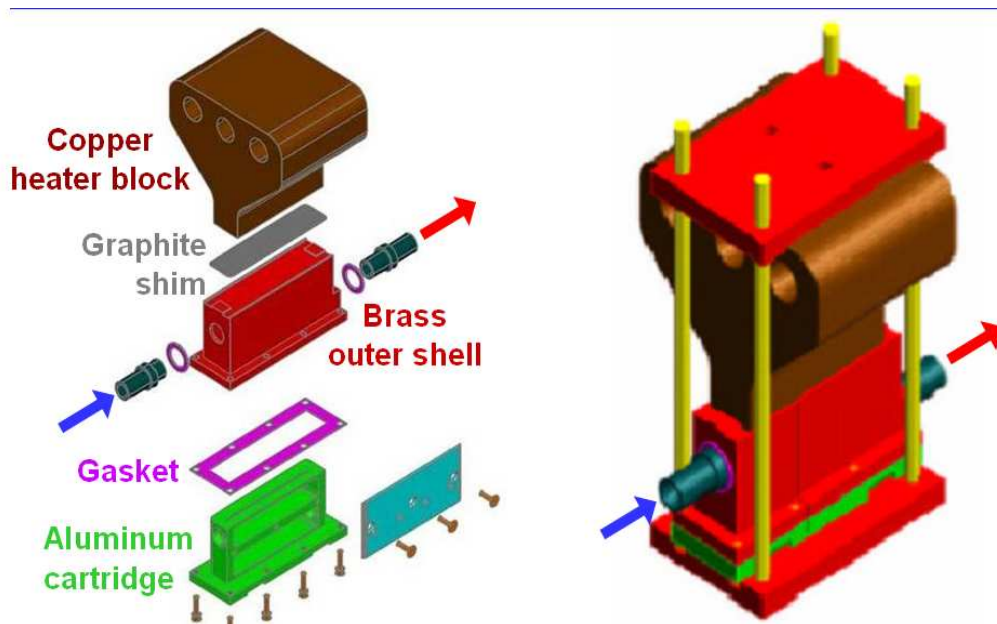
Assembled (right) and exploded (left) views of HCFP test section [28]
